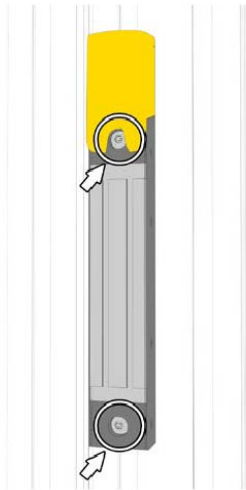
Attach the process guard locking to the profile at the desired height and tighten the Torx screws M6 x 25 mm.
